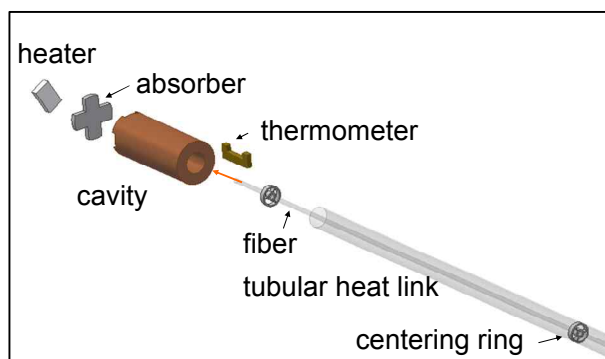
Exploded view of the radiometer cavity, optical fiber, heat link, thermometer and heater.
